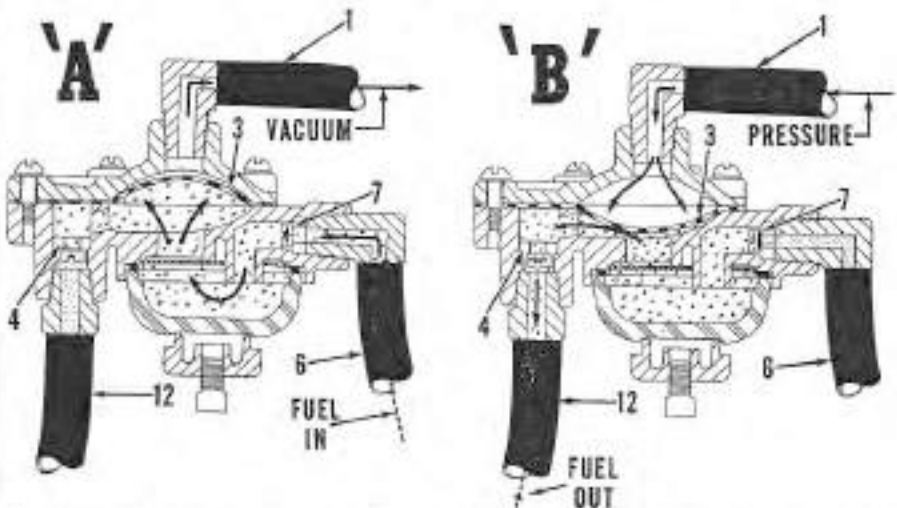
Schematic view of single stage fuel pump used. Fuel pump is operated by vacuum and pressure pulsations from one crankcase of the power head. Check valves (4 and 7) limit fuel flow to one direction through pump. Refer also to Fig. Mc54 for exploded view.
